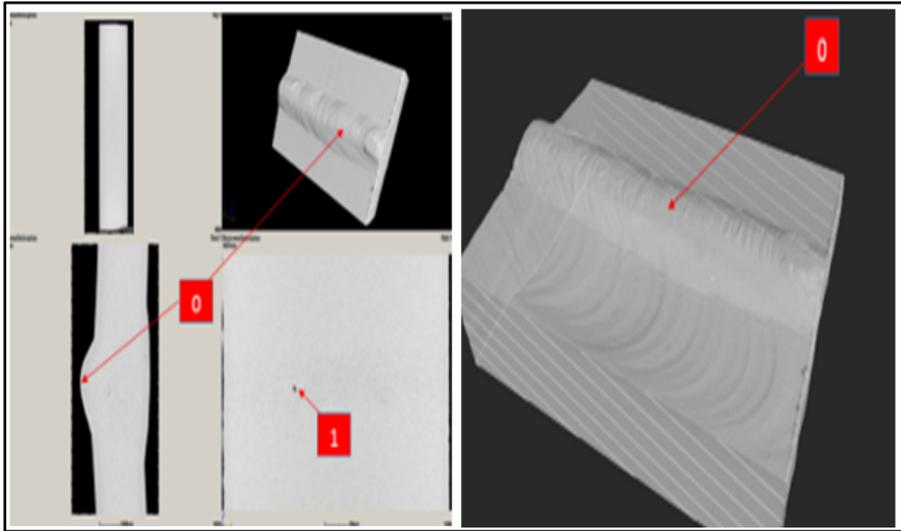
SPIV weld sample no. 1 tomograph (0-weld root; 1-gas pores) [1]
